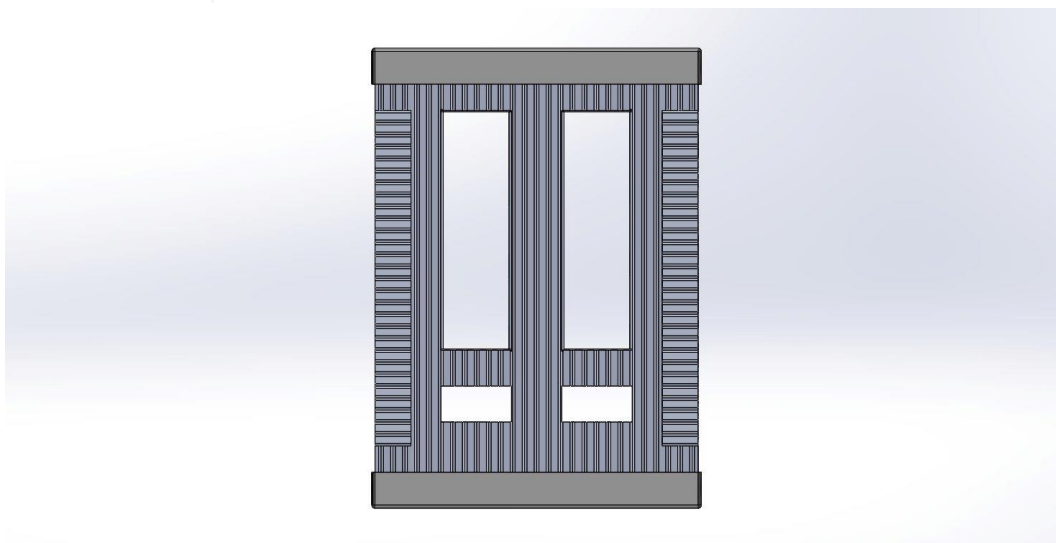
Side view of the battery pack enclosure showing finned cooling channels
